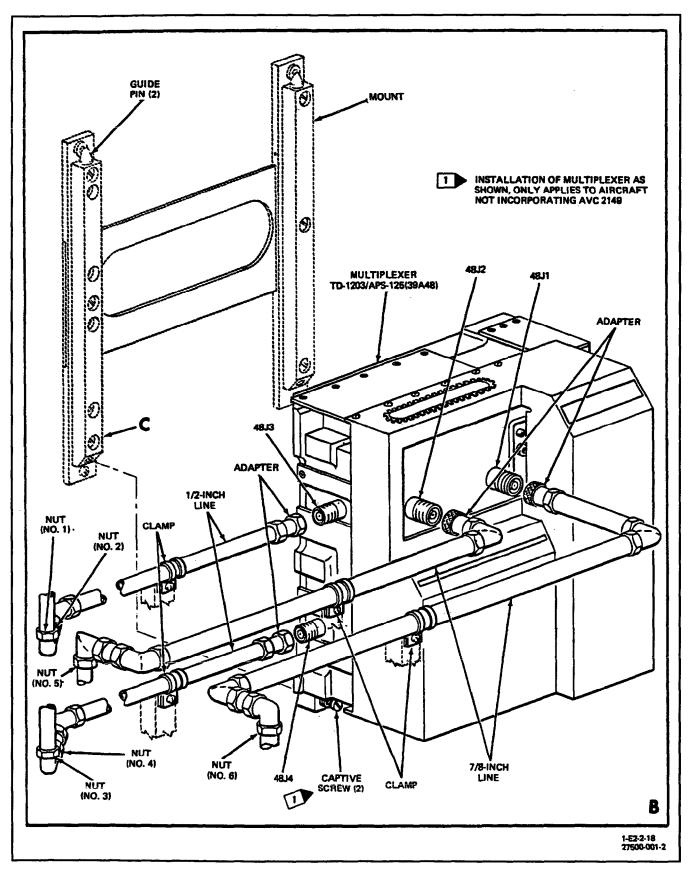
Removal and Installation of Multiplexer TD-1203/APS-125 (Sheet 2)
